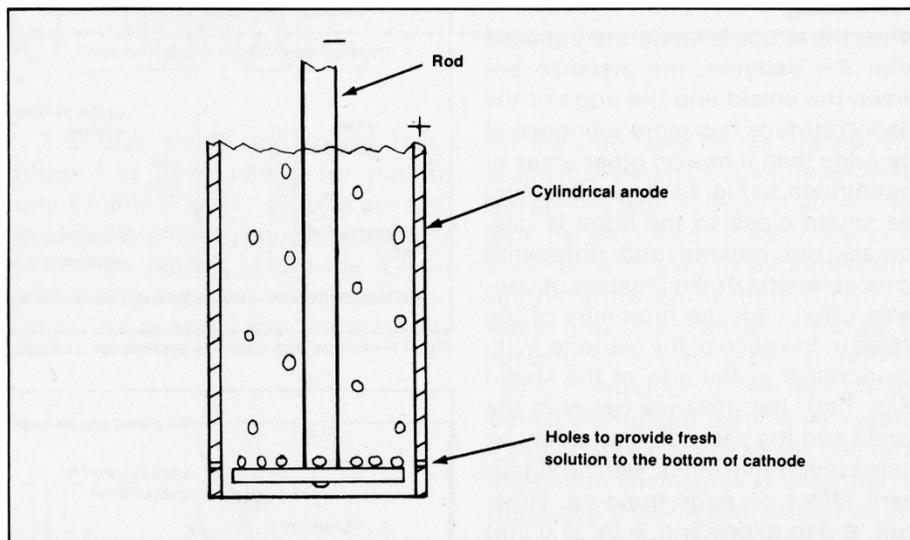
Conforming cylindrical anode with holes to provide fresh solution at the bottom of a rod plated with a nonperforated bottom disk.
